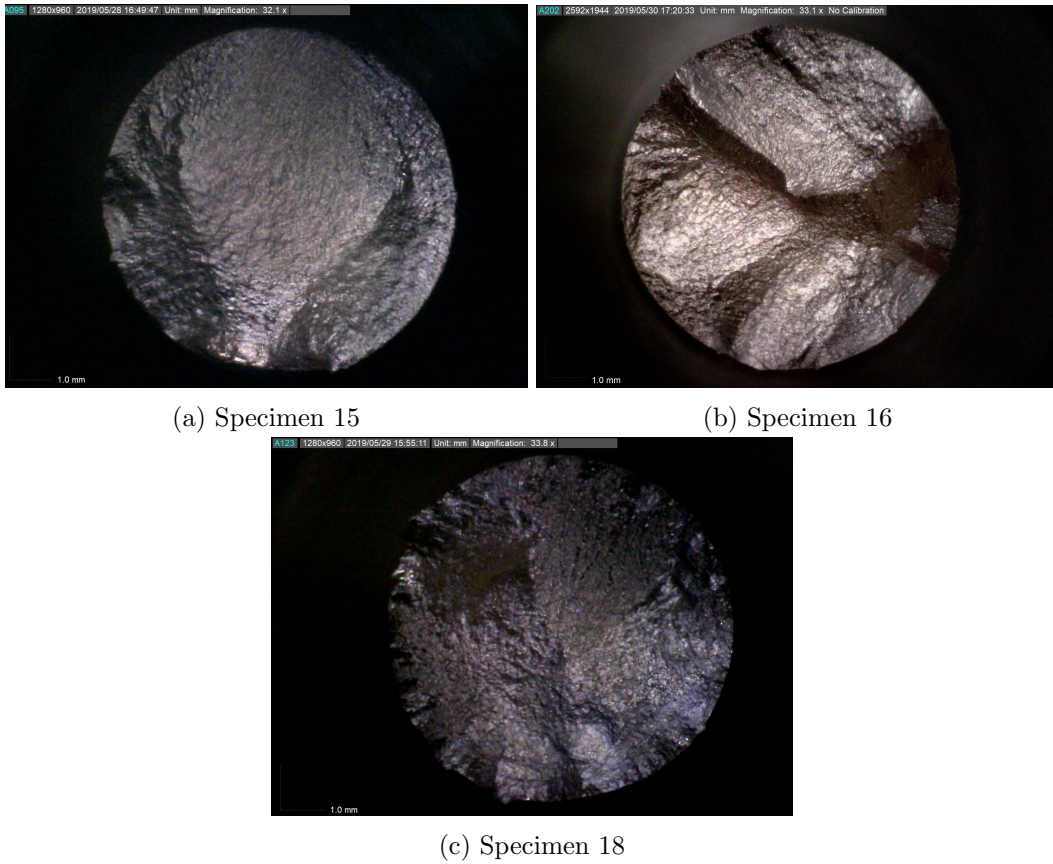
Fracture surfaces of specimens tested under proportional loading for $R=-1$
